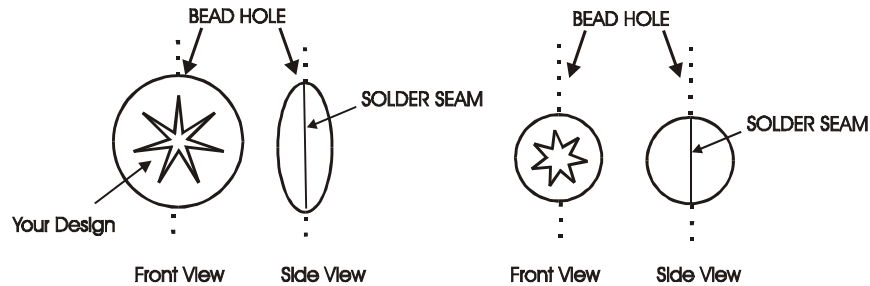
Tilted Domed Bead. The bead holes are located on the solder line. The bead on the left is a partially domed oblate spheroid bead. The bead on the right is a full sphere. Designs can be included on both the front and the back “faces” of the bead.
